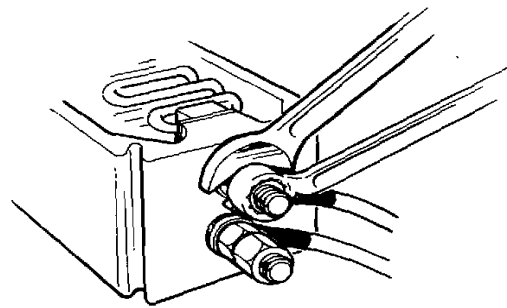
Tightening the nuts on terminal bolts, TD60, TD70
